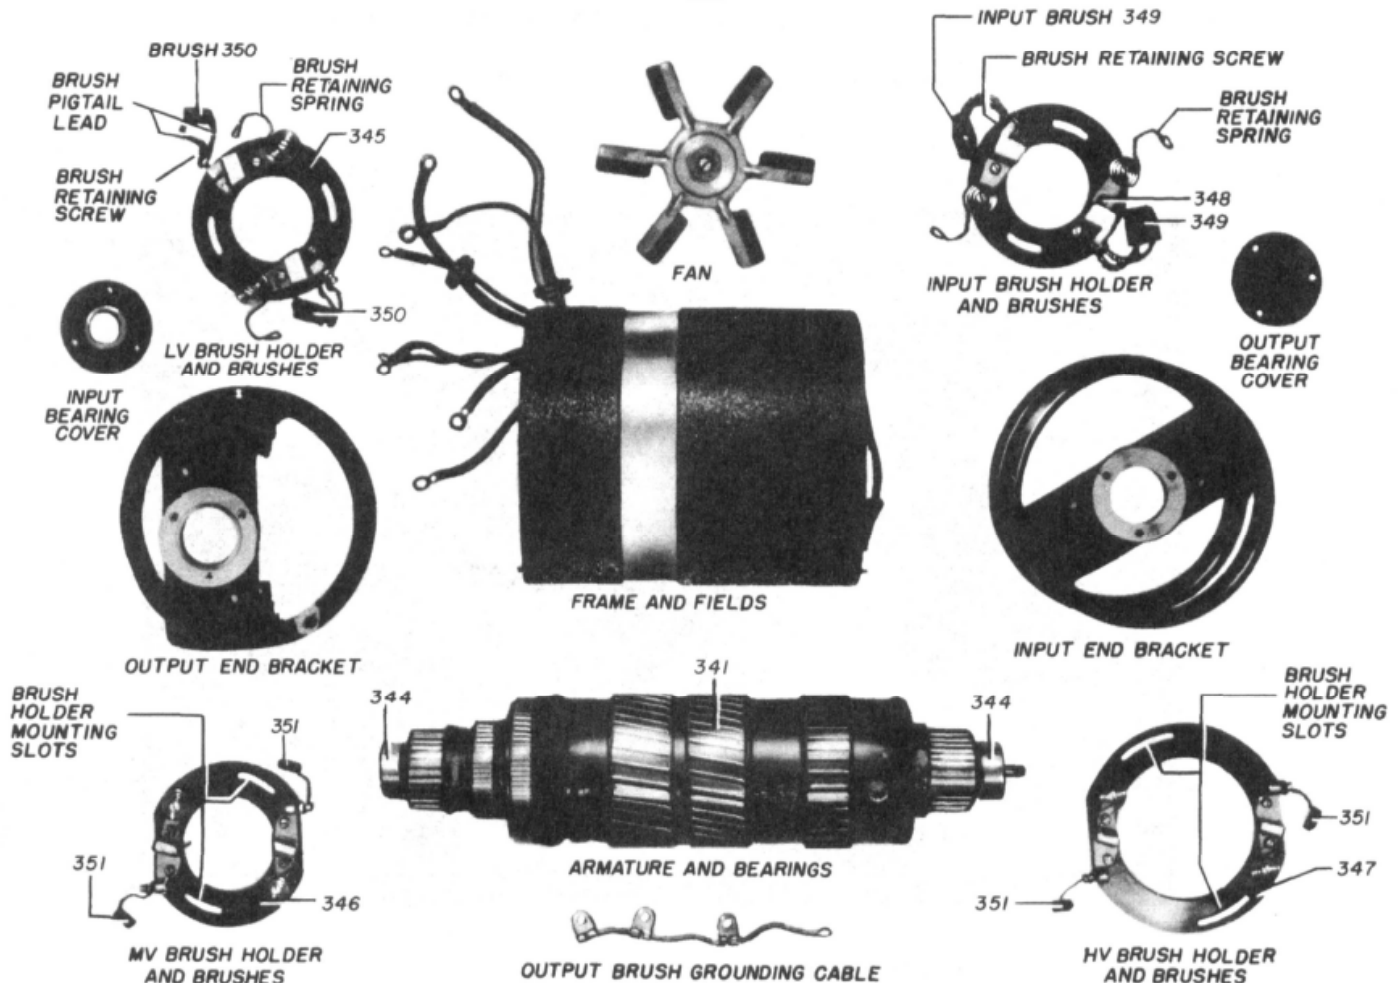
DYNAMOTOR, DISASSEMBLED
